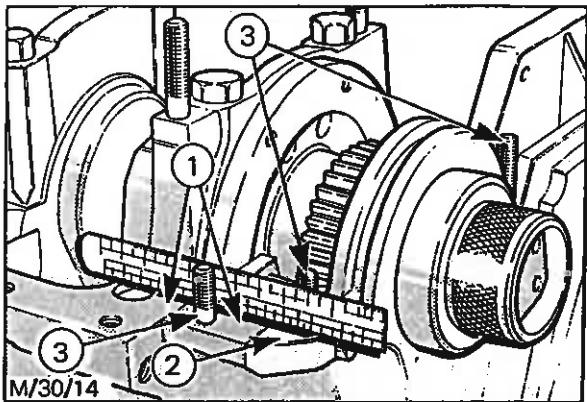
Timing Gear Housing and Cover Alignment (Left Hand Side on 2728T Engines)
